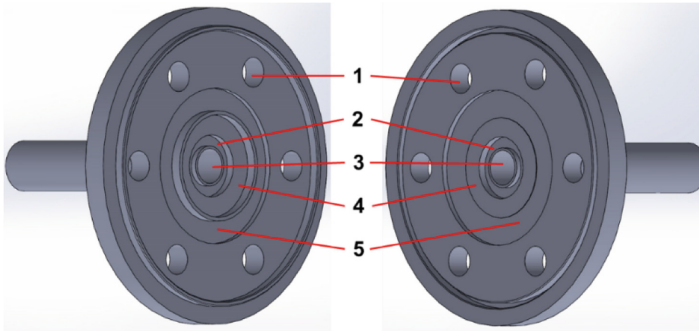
Upper side (left) and lower side (right) of the specimen holder. 1: Through-bore, 2: Groove for inner O-rings, 3: Inlet and outlet of the test liquid, 4: Specimen contact area, 5: Groove for outer O-ring
